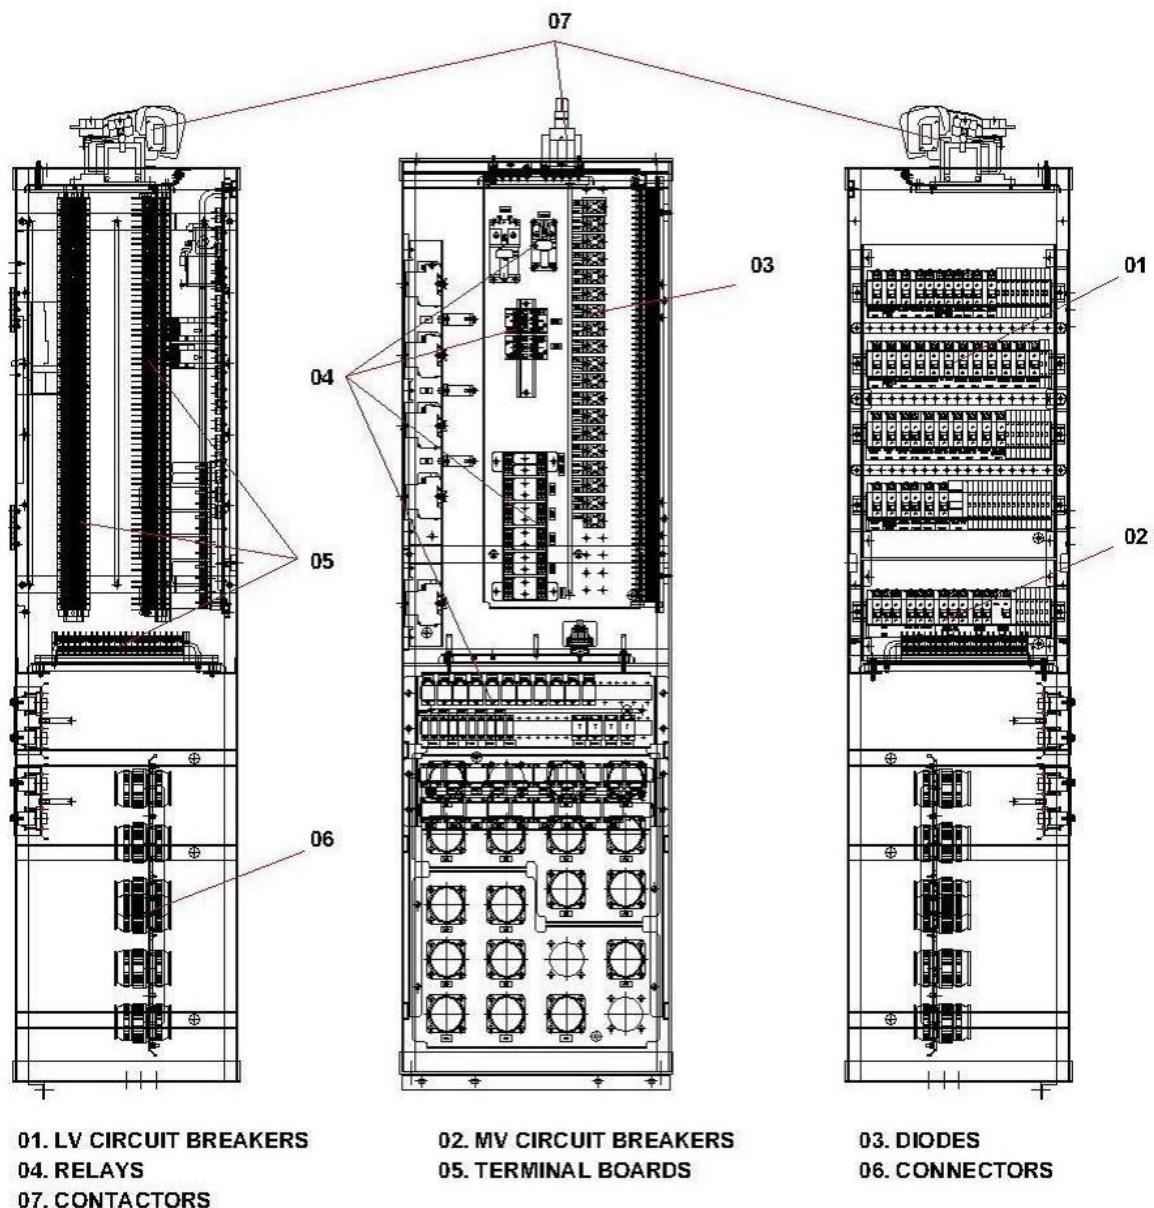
I-02.54 “B” Cab Electric Locker Layout
